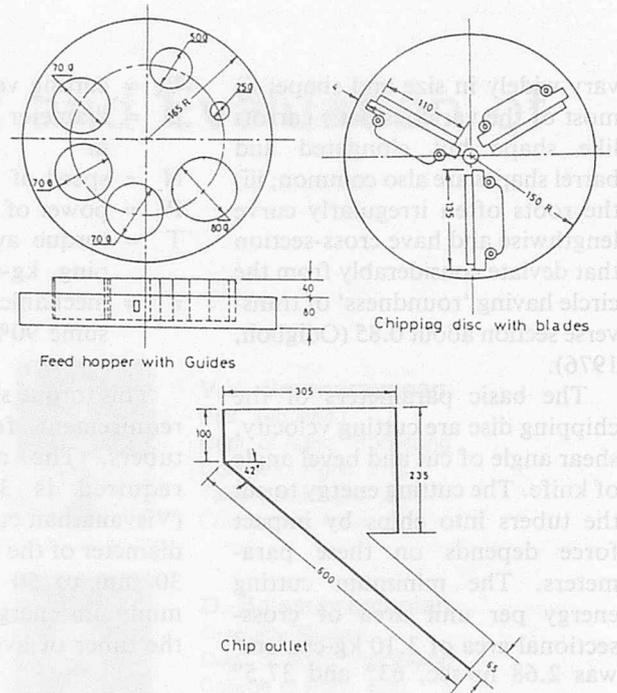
Feed hopper, chipping disc and chip outlet of cassava chipper.
